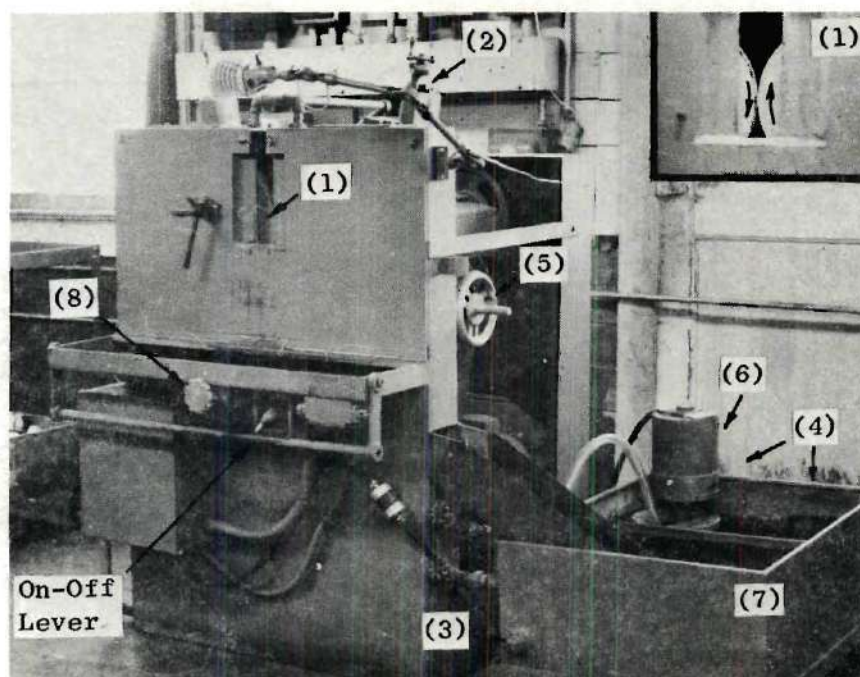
Nicholas Hollow Grinding Machine. Insert is Detail View of Abrasive Wheel Configuration, Arrows Indicate Wheel Rotation. Numbers Refer to Discussion in Text.
